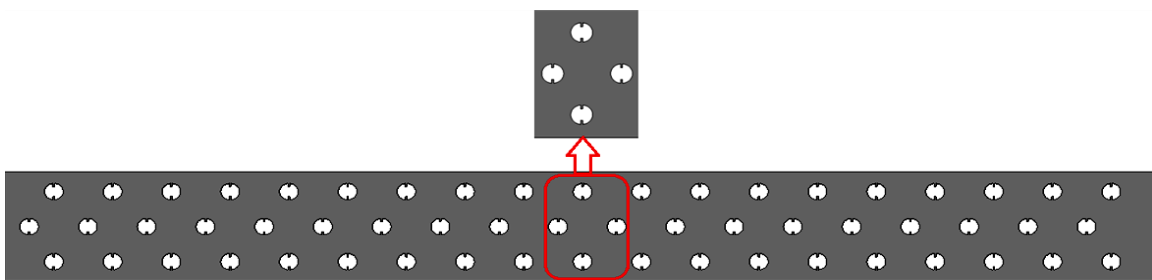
Design-2 CAD drawing of the CO₂ (carbon dioxide) gas cooler with finned tube.
